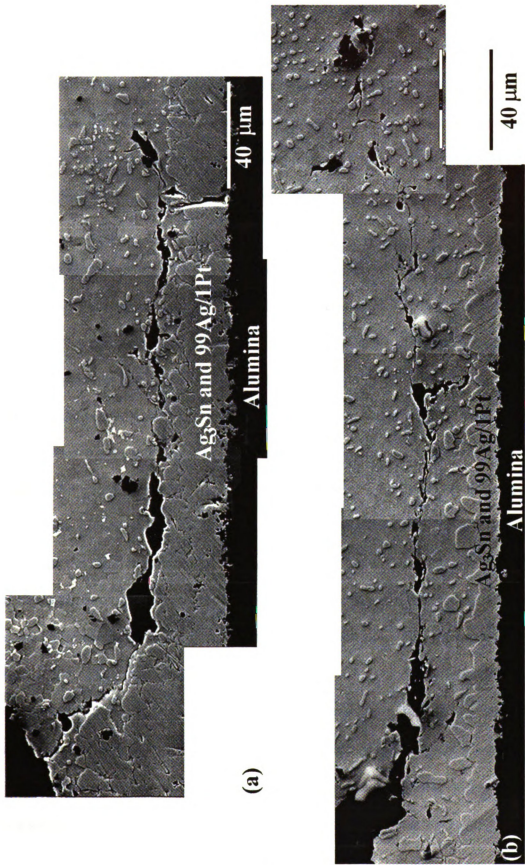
ESEM micrographs showing the crack within bulk region of the solder joint after 1000 thermal cycles. (a) is the eutectic Sn-Ag solder joint and (b) is the 95.5Sn/4Ag/0.5Cu solder joint.
